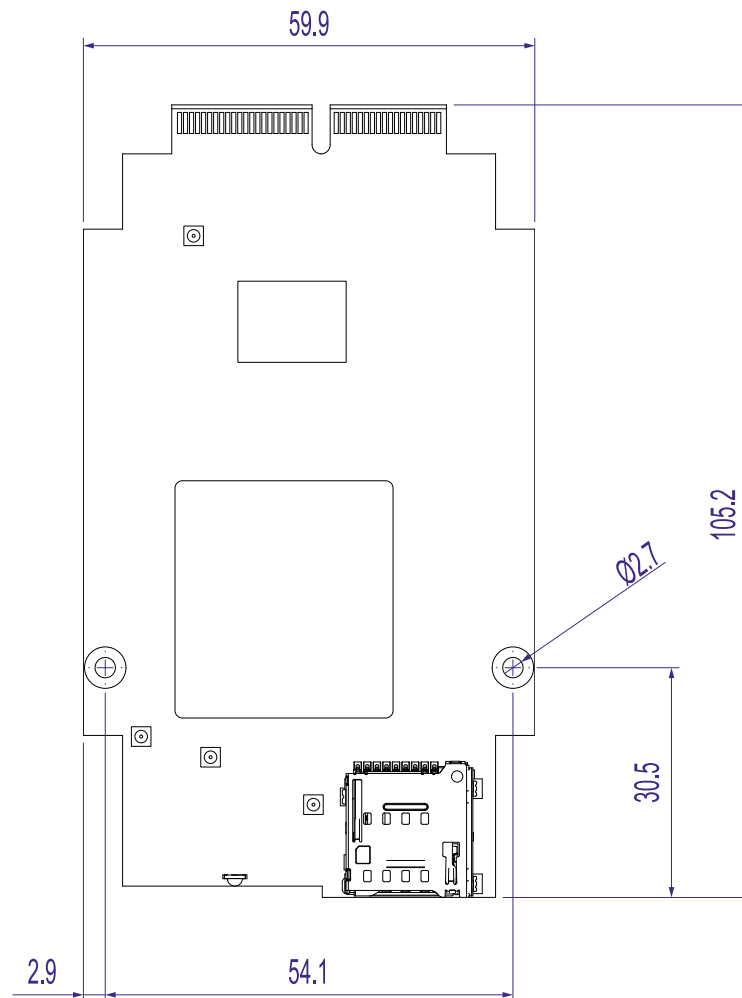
ReliaCELL 10-32 mechanical dimensions (in mm)
